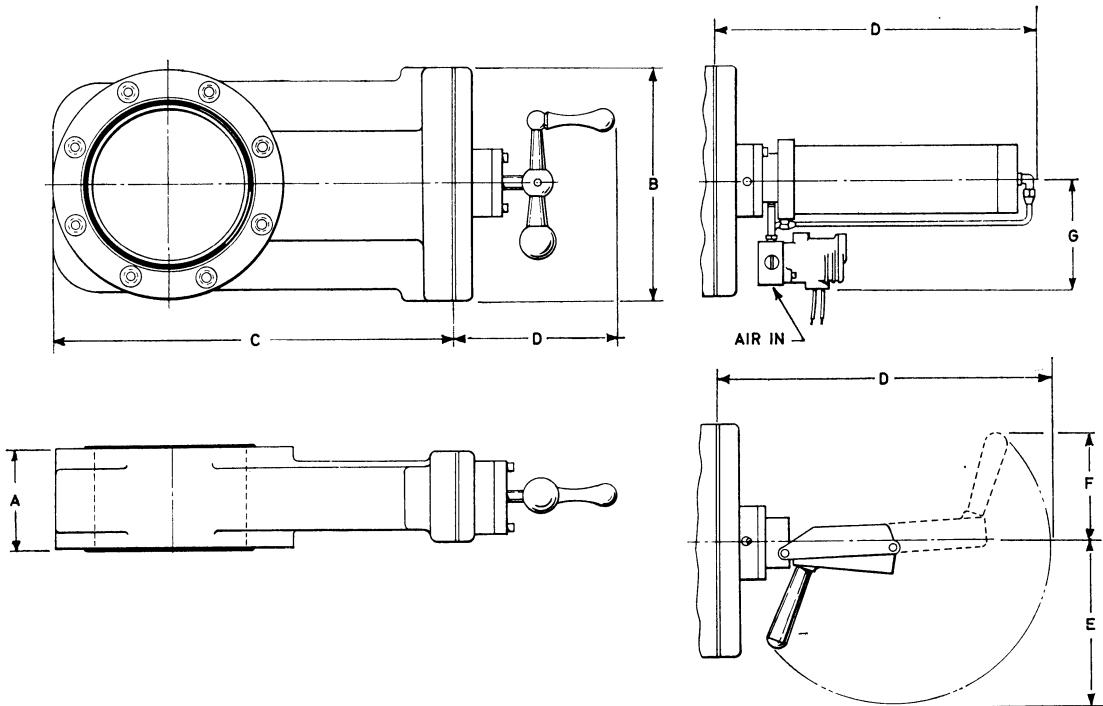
Dimensions of gate valves supplied by C.V.C.²³¹ (Table 6.16)
